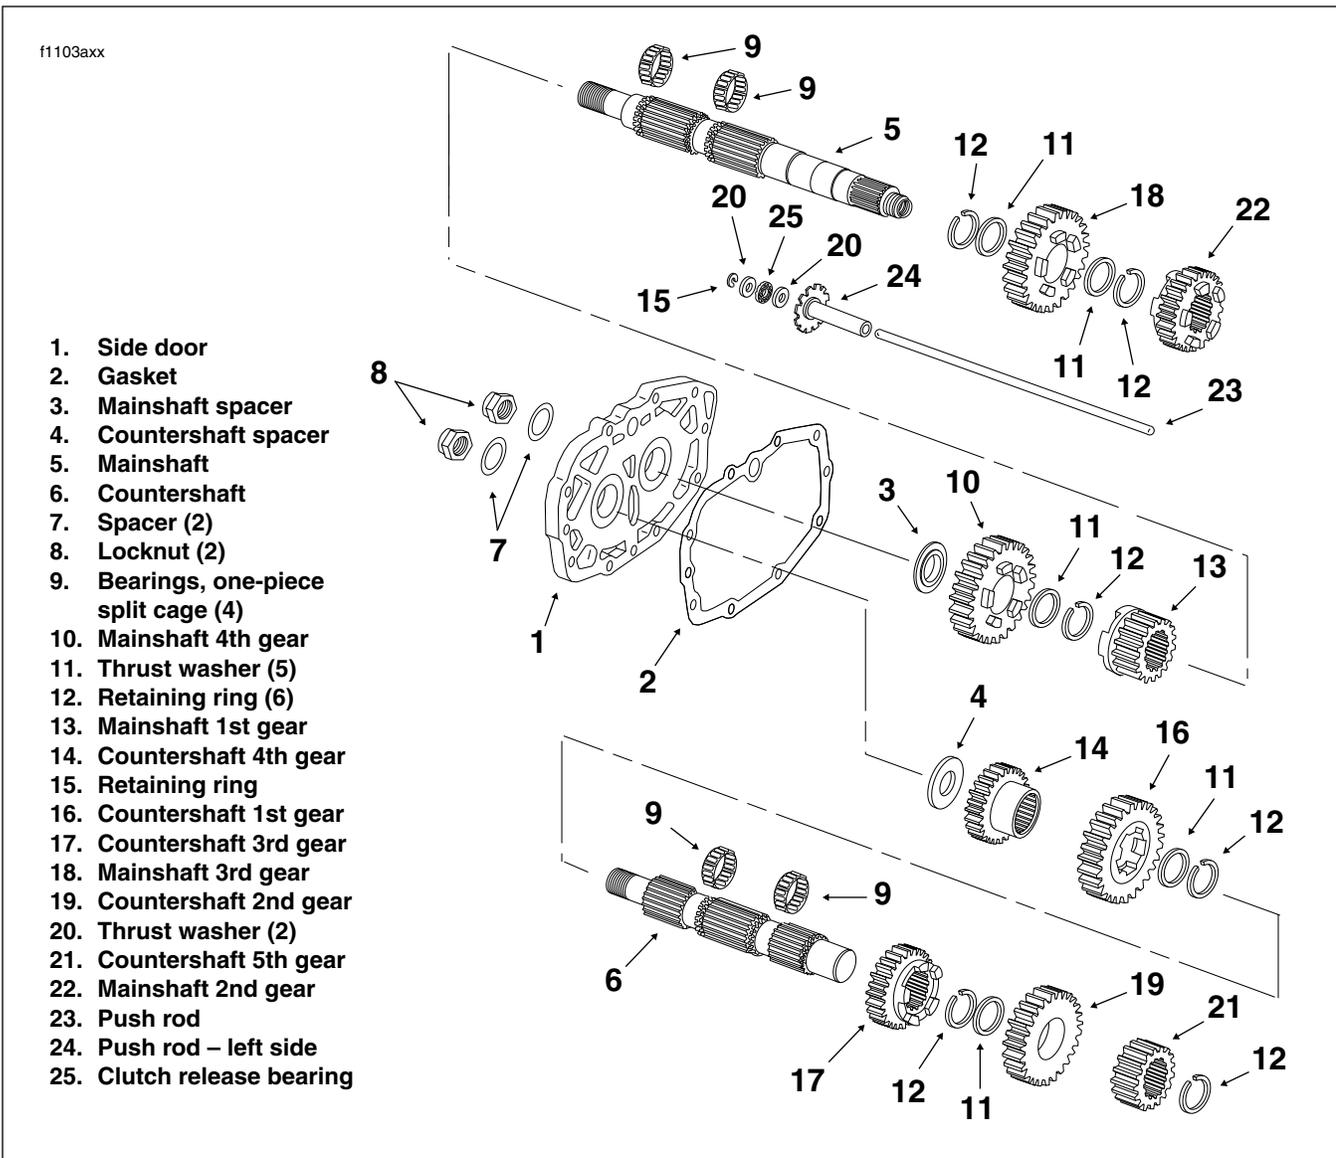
Side Door, Mainshaft and Countershaft Assembly (Exploded View)
